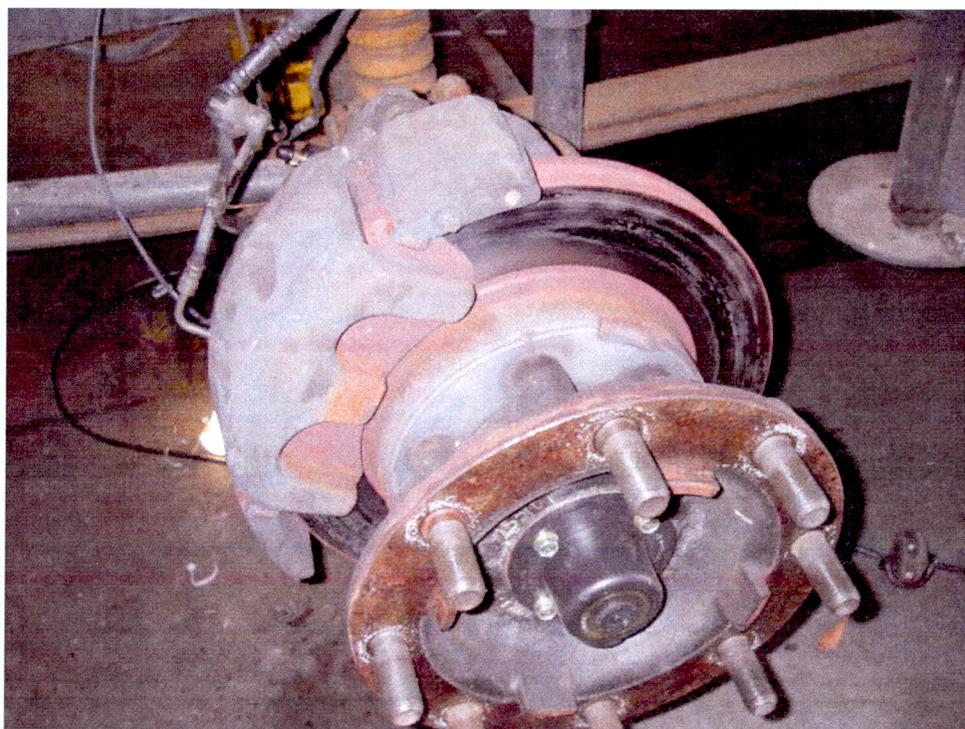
Overall View of the Left Front Brake Showing the Marks on the Rotor and the Paint Missing on the Center Finger of the Caliper Housing
